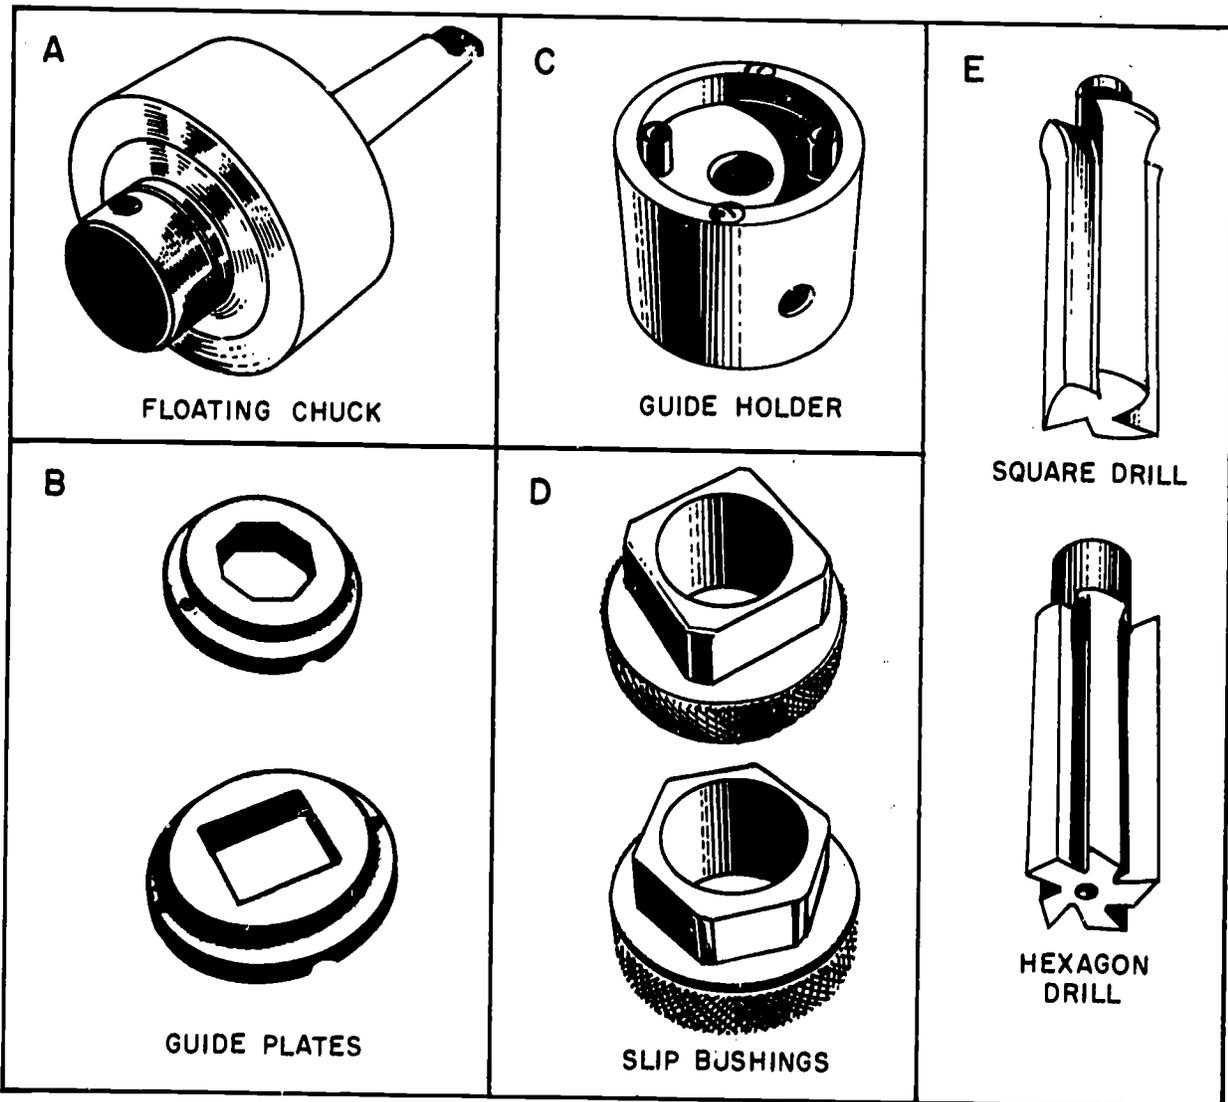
Equipment for drilling angular holes. A. Chuck; B. Guide plate; C. Guide holder; D. Slip bushing; E. Angular drill
